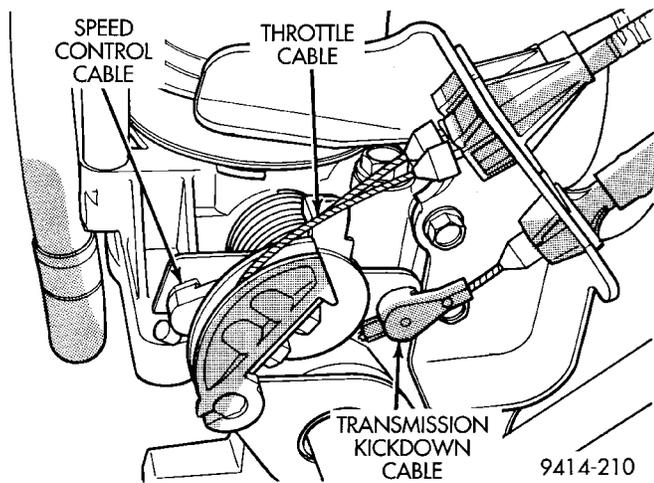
Throttle Cable Attachment to Throttle Body—Automatic Transmission
